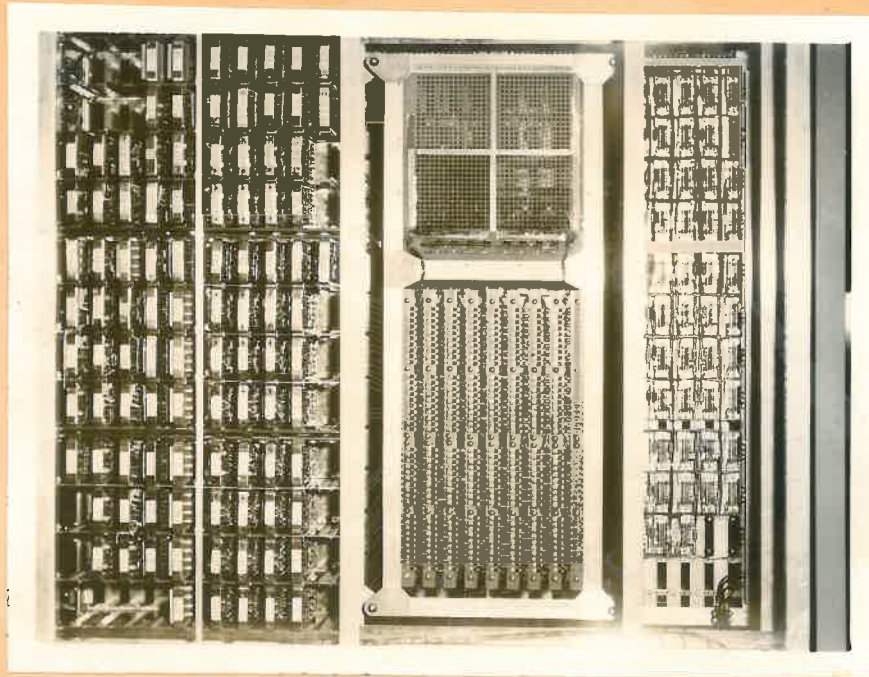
MECHANICAL ASSEMBLY OF CONTROL FIXED STORE
